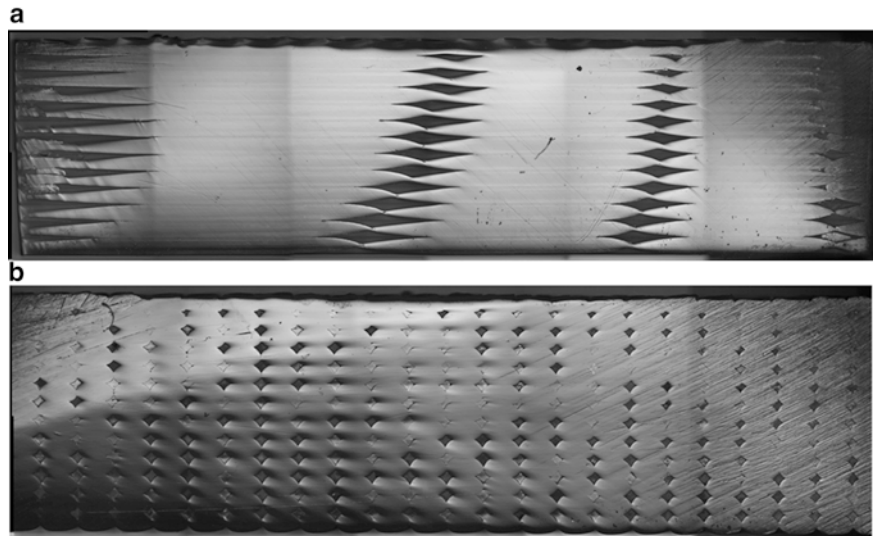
(a) Longitudinal, and (b) transverse cross-sections of “high” road density specimen
